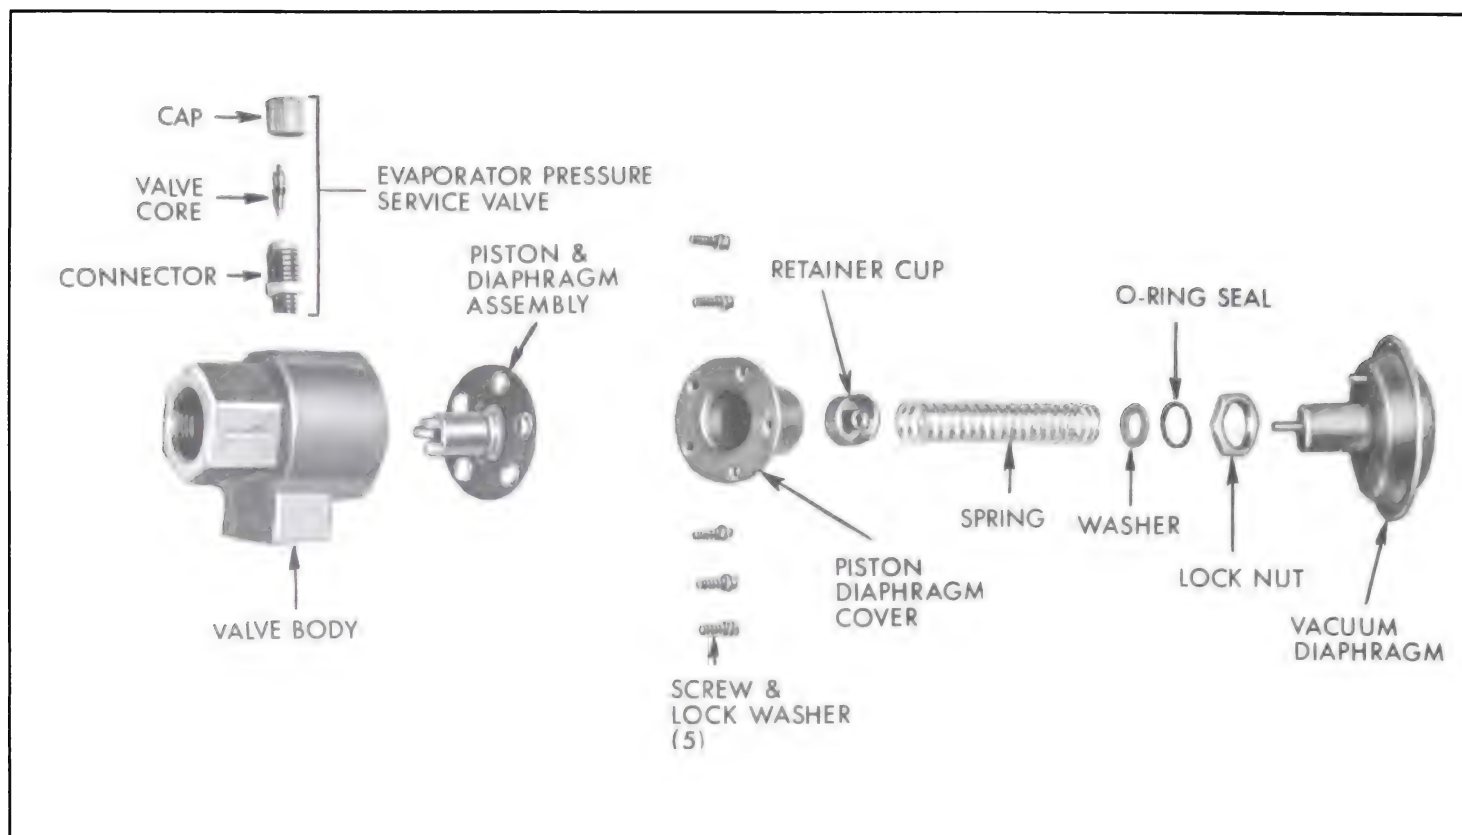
Suction Throttling Valve (Exploded View) - 4700 Series
